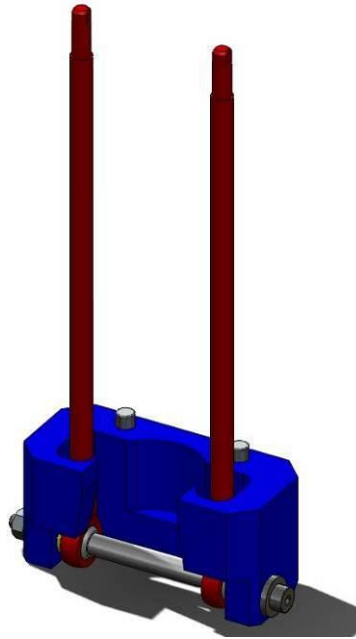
D0902454 Stage 1-2 Blade Puller Assembly Bottom Parts (starting point for this installation)
